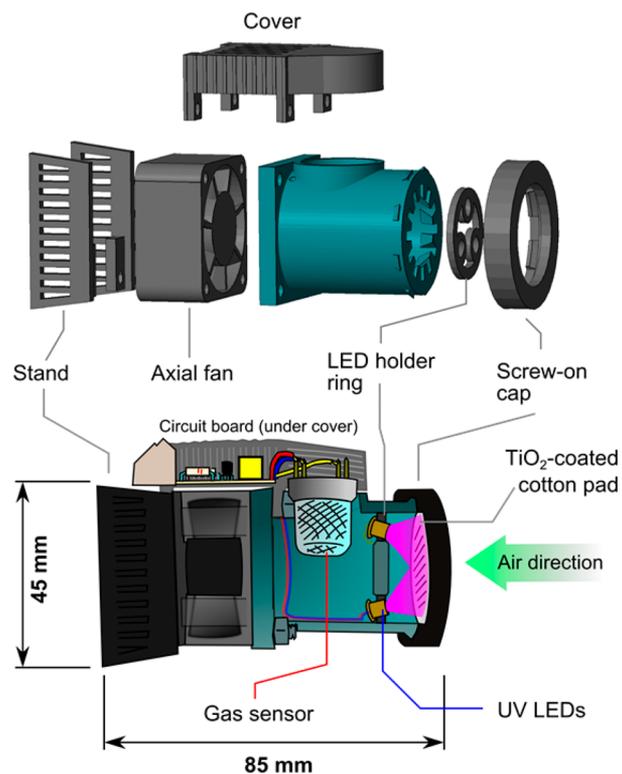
Schematic drawing of the photocatalytic gas phase reactor showing an exploded 3D view (top) and a side-view (bottom).
